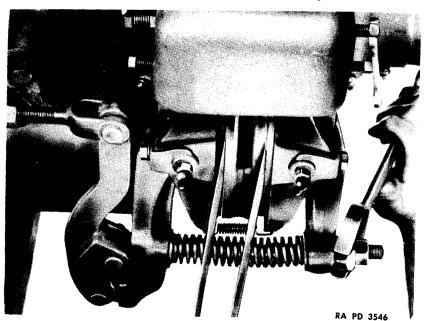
Drive Shaft Brake Rear Shoe Adjustment
